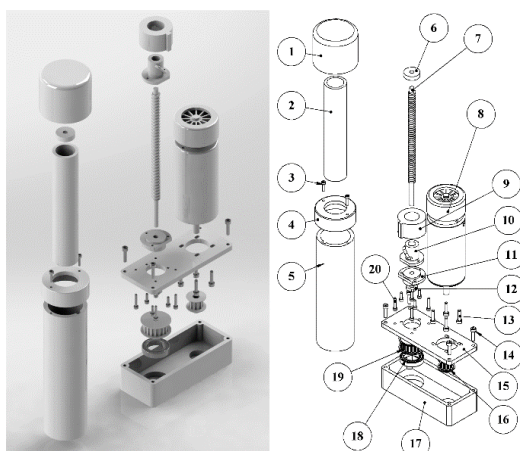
Exploded view of electrical linear cylinder (left) and the components (right)
